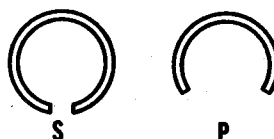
Note difference in shape of spacer rings used on splash lubricated (S) and pressure lubricated (P) transmissions, except TW-10, TW-20 and TW-30 which are not equipped with spacers (18 or 20—Fig. 160). Refer to paragraphs 192 and 195 and to Fig. 153 for placement.
